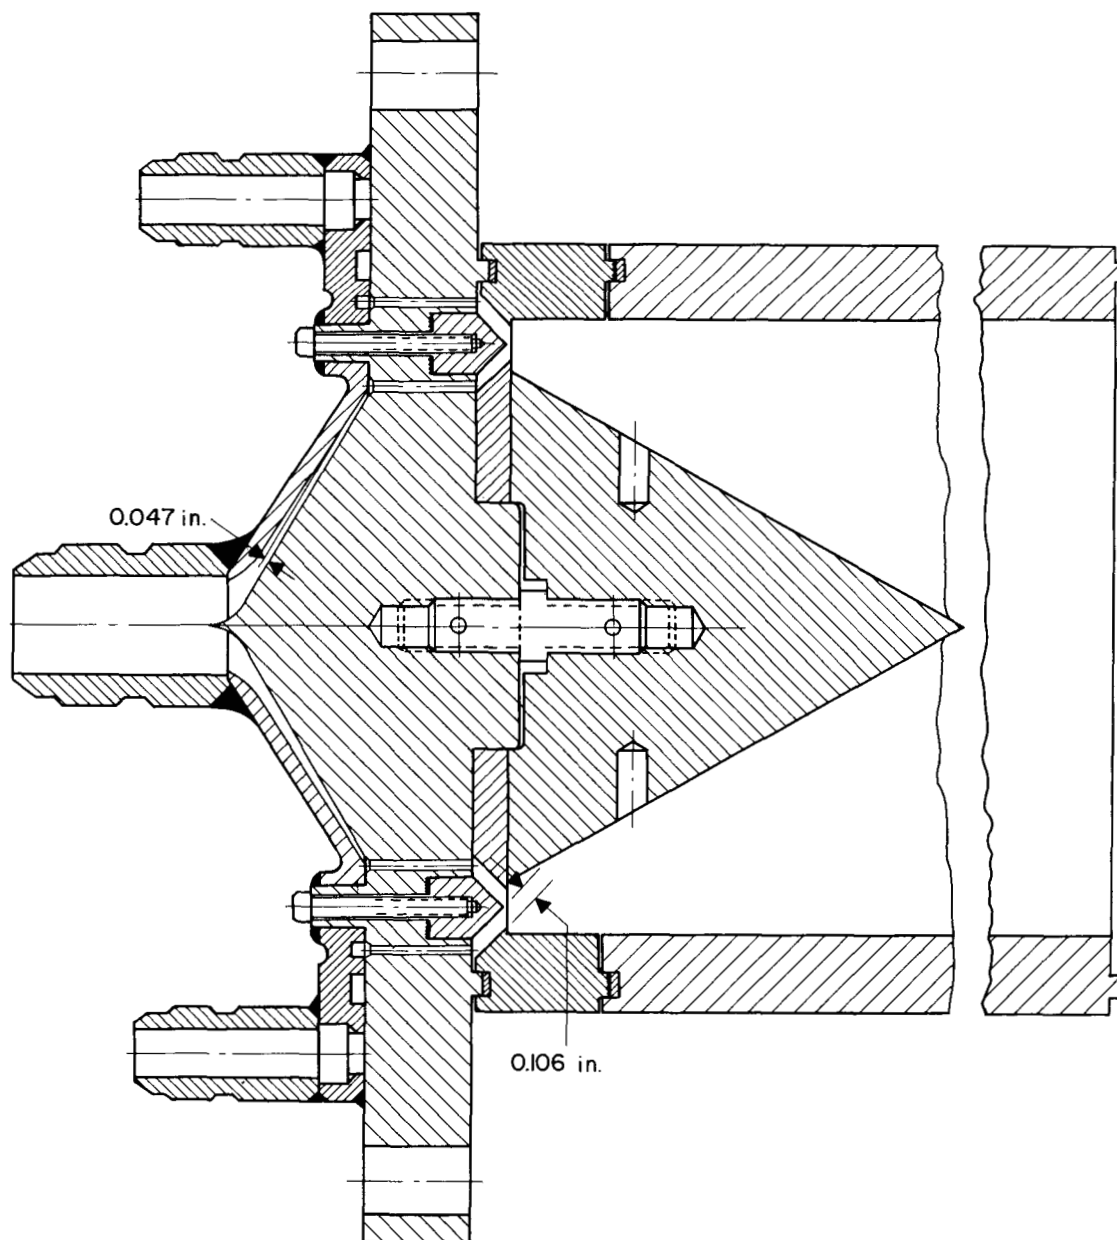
Assembly drawing of annular impinging sheet-spray injector and combustion chamber
